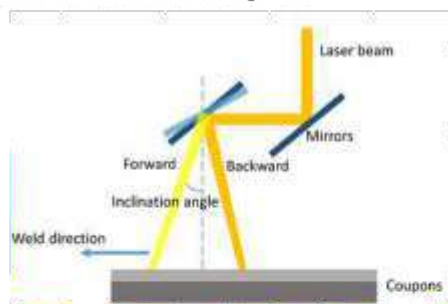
Schematic of remote laser lap welding process on AA5182 1 mm + 2 mm plates
